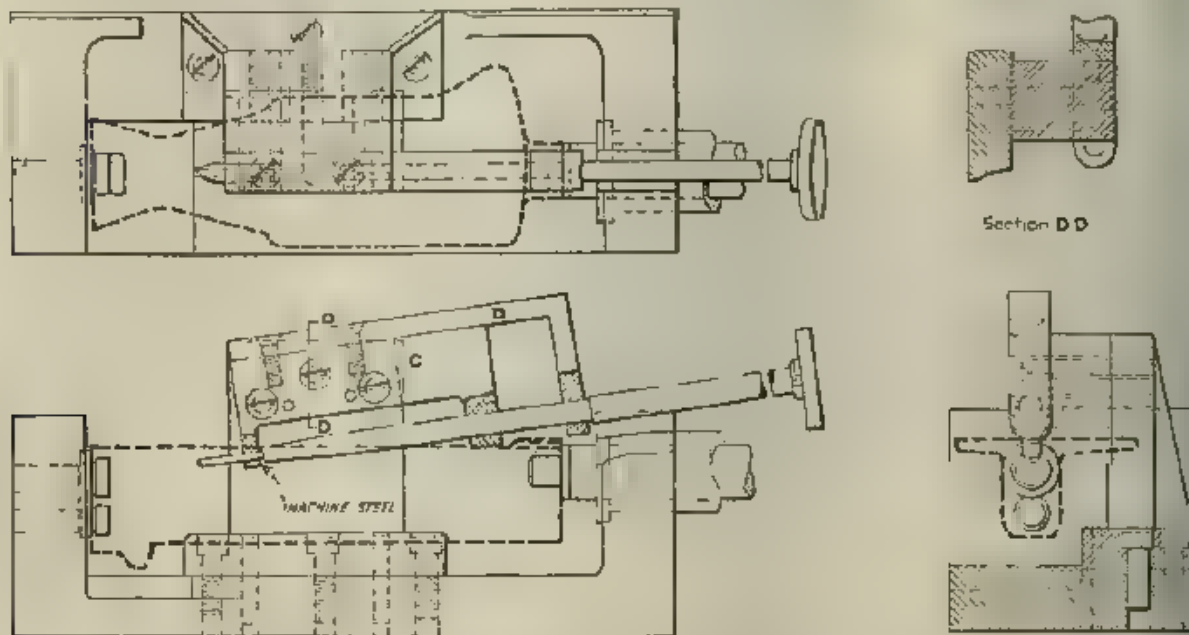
HAND REAMING FIXTURE FOR CARTRIDGE GUIDE WINGS
